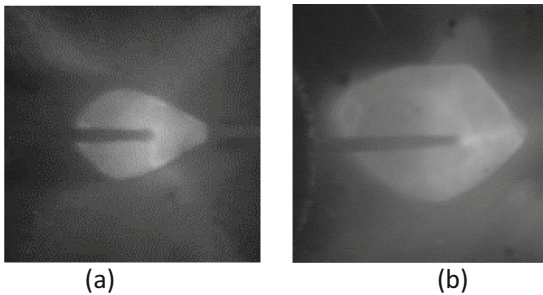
Typical multi-pass weld pool image. (a)The pool image of backing. (b) The pool image of backing first pass of the 3rd layer.
